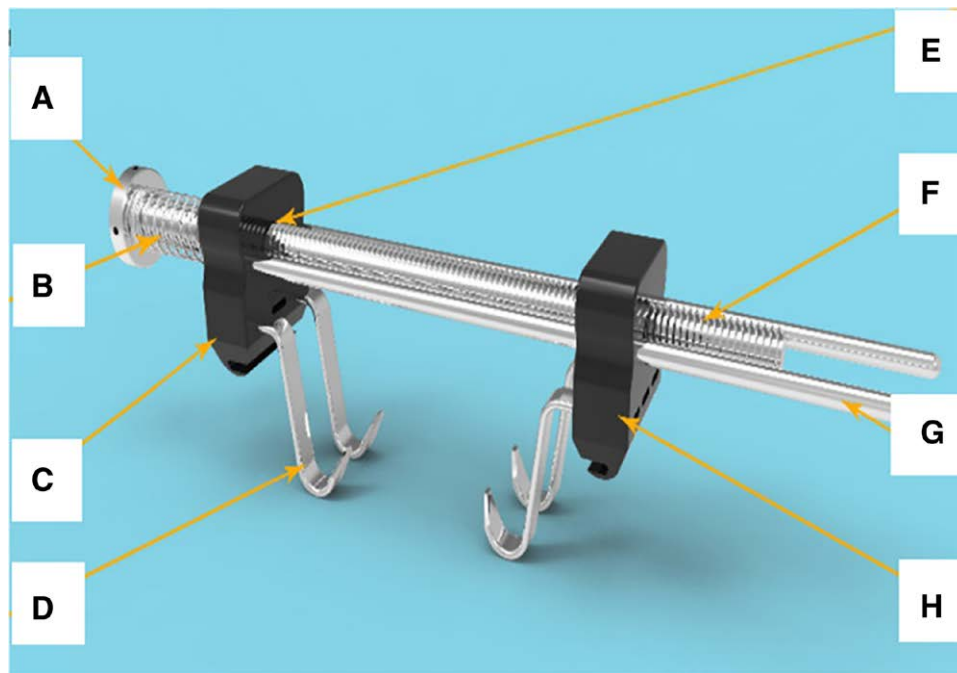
BHS comprises 2 hook clamping modules (c) and a compression module. Each holder module consists of a threaded rod cap (a), a threaded plunger hole (e), 2 guide holes, and 3 hooks with sharp tips (d), positioned to face each other. The compression module includes a threaded rod (f), a spring (b), and 2 guide rods (g). The threaded rod passes through the threaded plunger hole (e) on the hook holder module using the 2 guide rods. Reprinted with permission from *World J Surg Oncol.* 2020;18:247.
